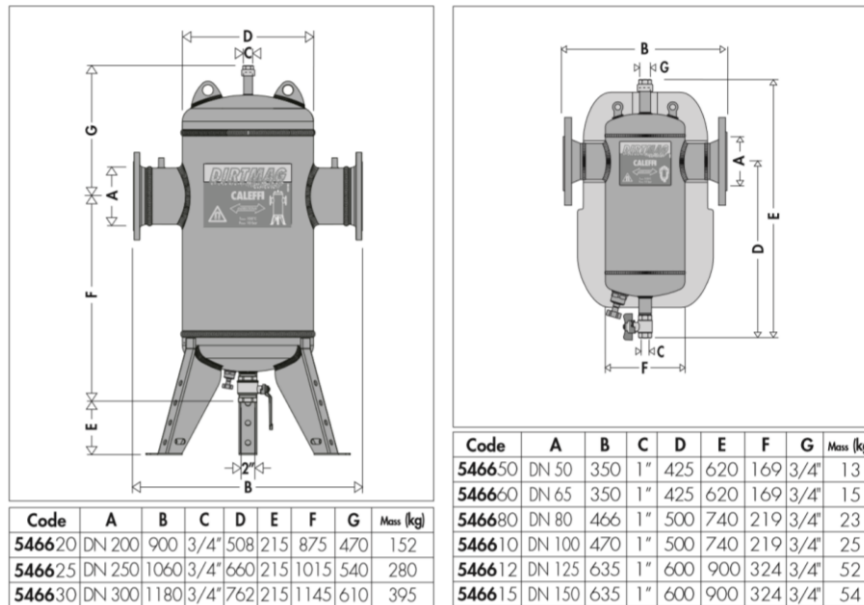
Technical sketch filter type 5466 flanged (DN 50 – DN 300) [45]
